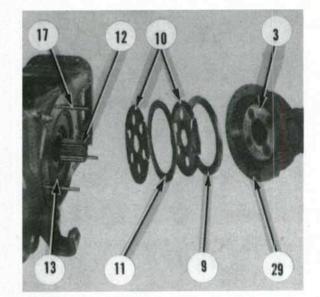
View of Model TW-35 brake components. A single brake disc (10) is used on Models TW-5, TW-15 and TW-25.
